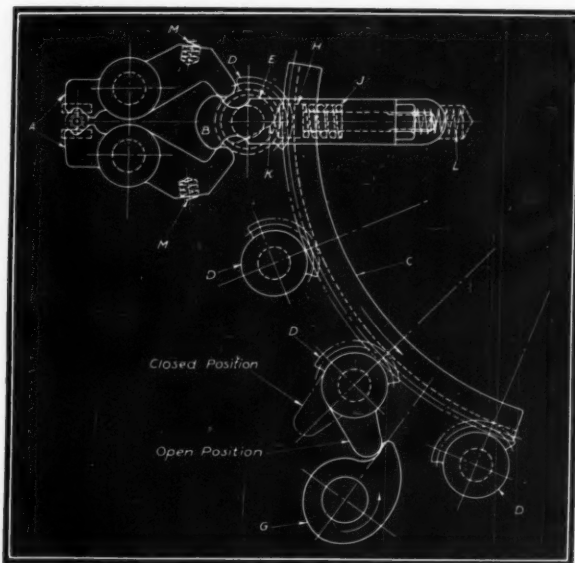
Section of ring gear, pinions and clamping mechanism for the clevises
